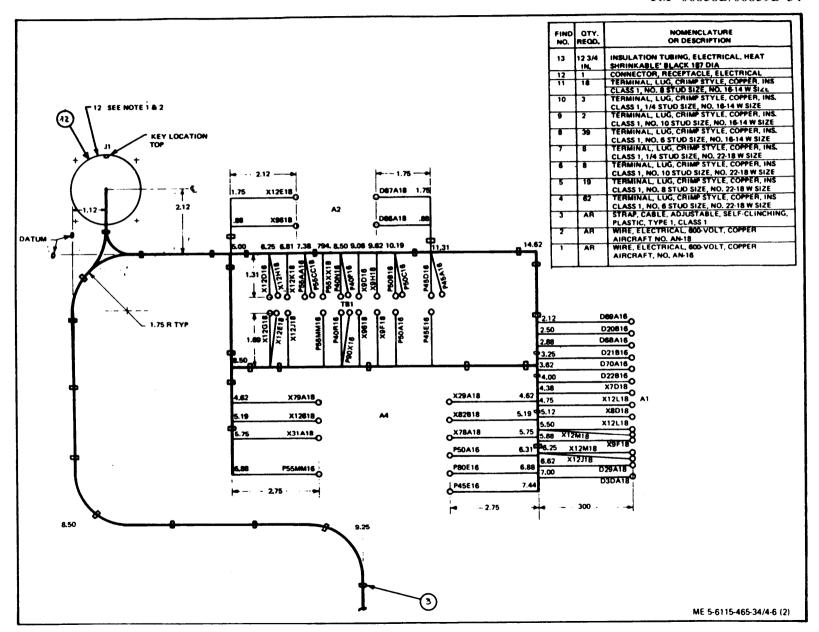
Control Cuticle Wiring Harness (Sheet 2 of 3) Drawing No. 69-677
